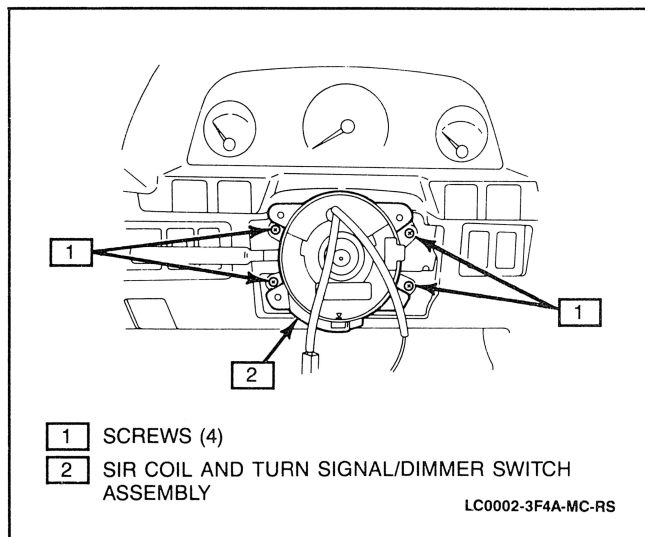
SIR Coil and Turn Signal/Dimmer Switch
